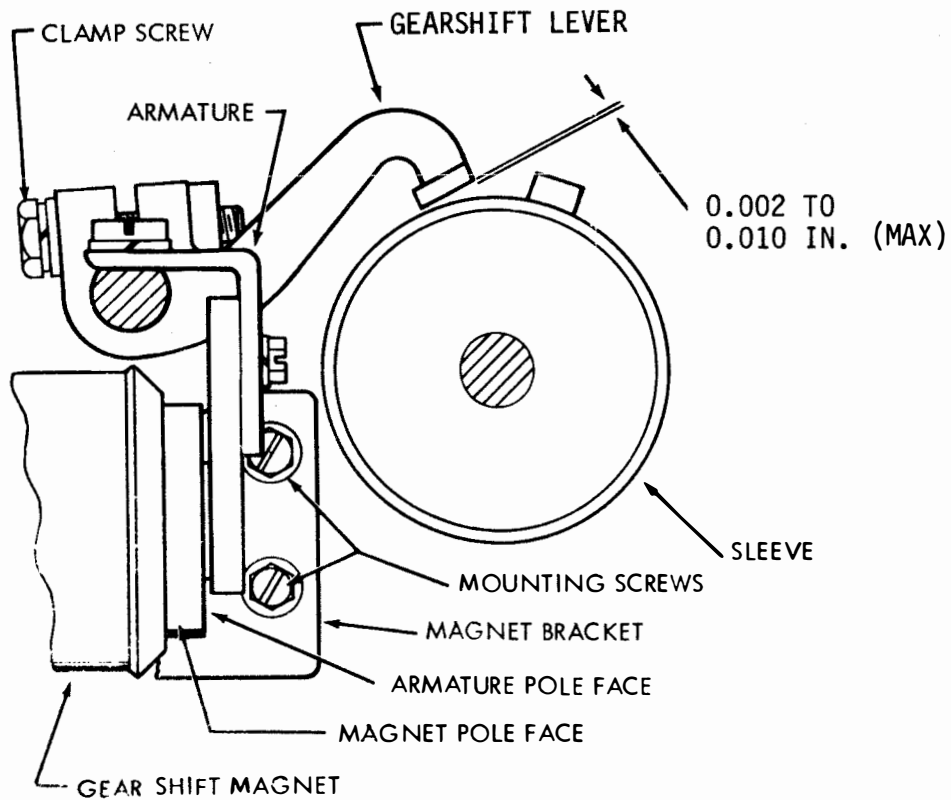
Gearshift Magnet and Clutch Stop Lever
